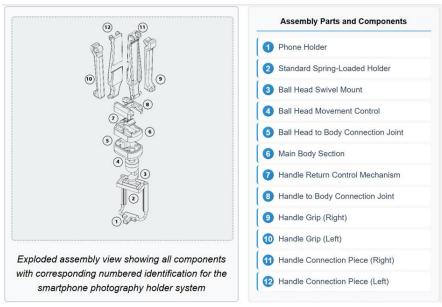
Exploded assembly view of the ergonomic smartphone photography holder system
